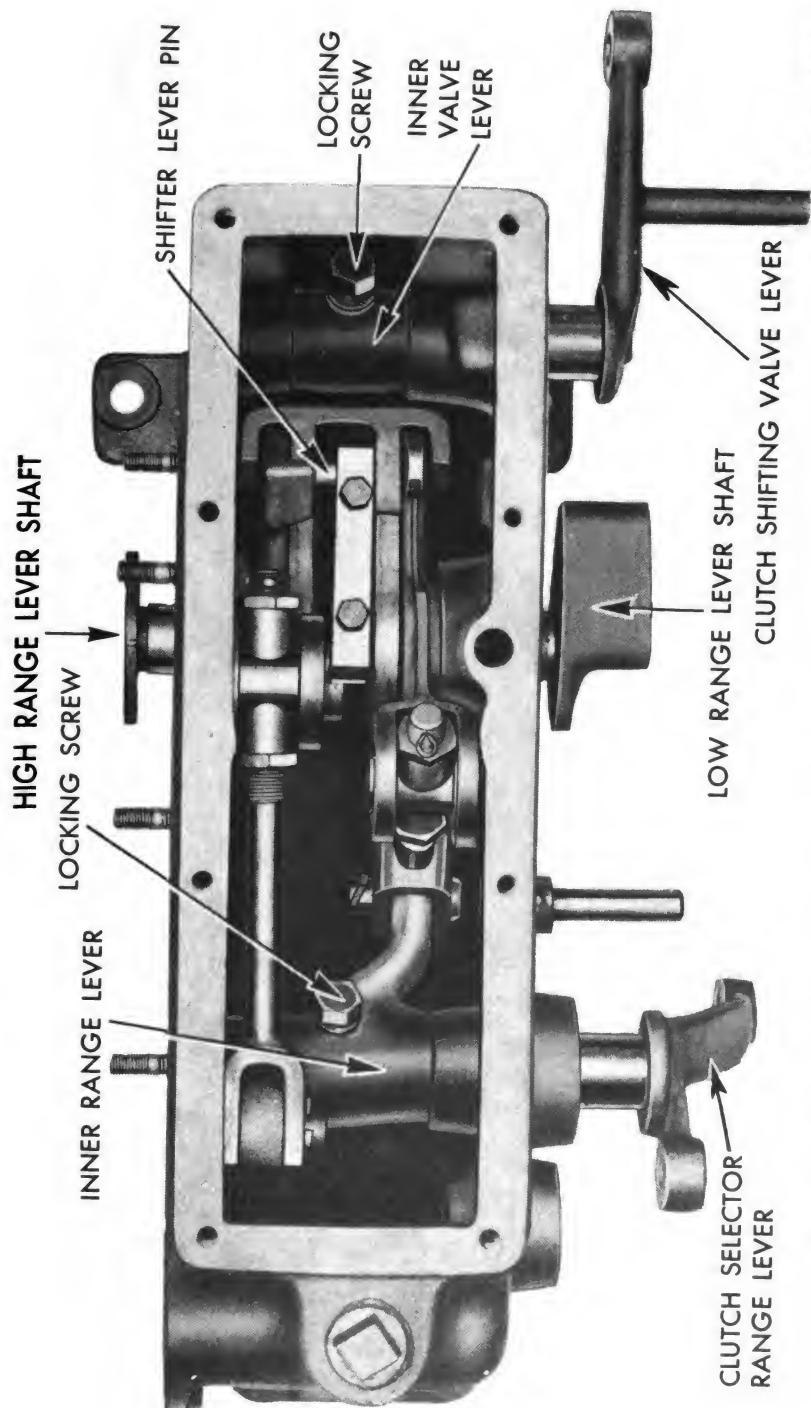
View in Clutch Selector Housing Preparatory to Removing Lever Assembly
